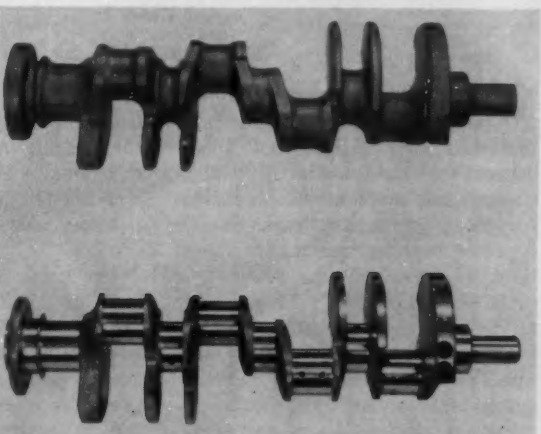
Automotive crankshaft molded by the shell process, showing shell-molded ArmaSteel casting before machining, weight 64 lb, top, and after machining, weight 54 lb, bottom.
